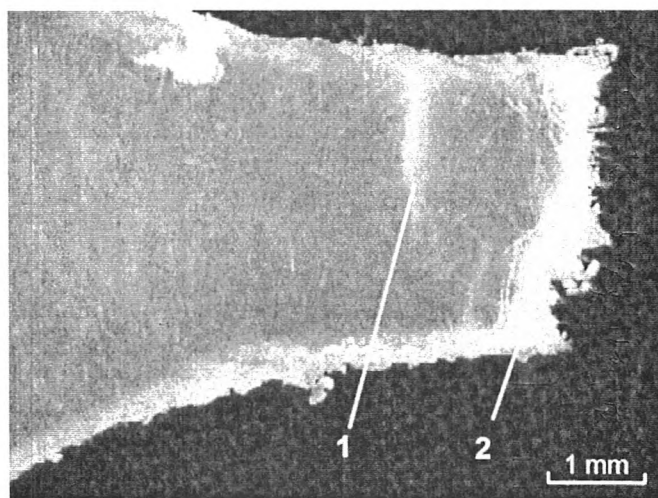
A photo of the sample blanked from a Malen P J-400 PP molded piece after the test, with marked stress cracks formed on blanking and following the direction of polymer flow inside the mold and the direction of load axis
